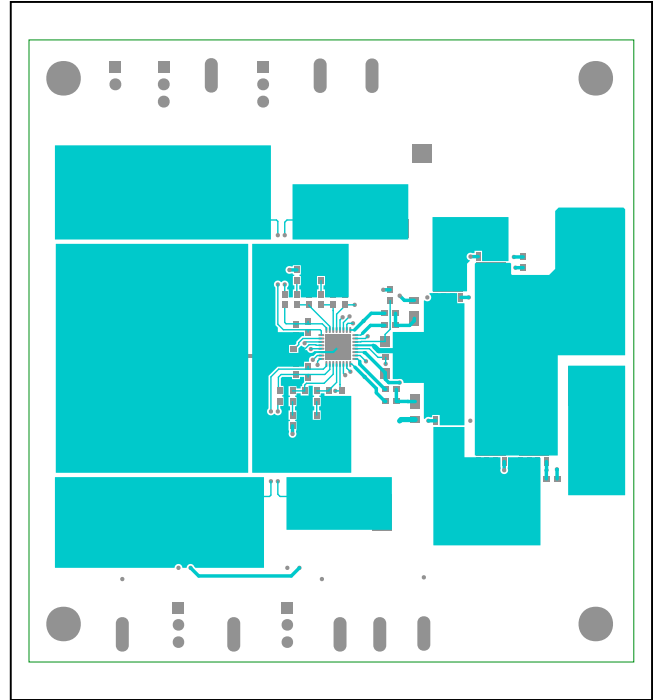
MAX17558 EV Kit PCB Layout—Component Top Side
